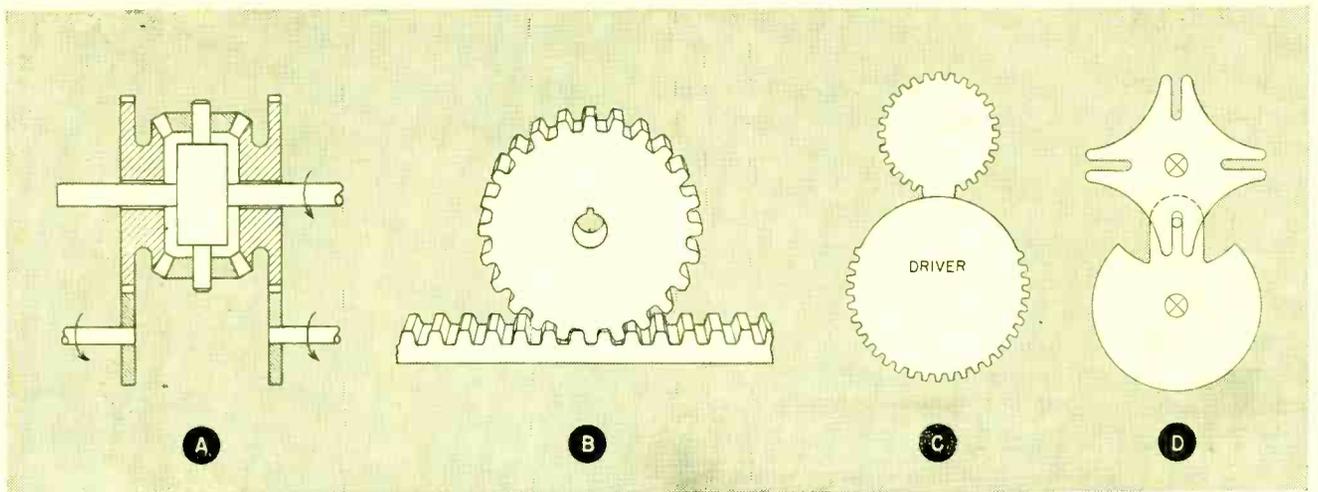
Special gearing systems: differential gears (A), rack and pinion (B), intermittent gears (C) and Geneva mechanism (D)
